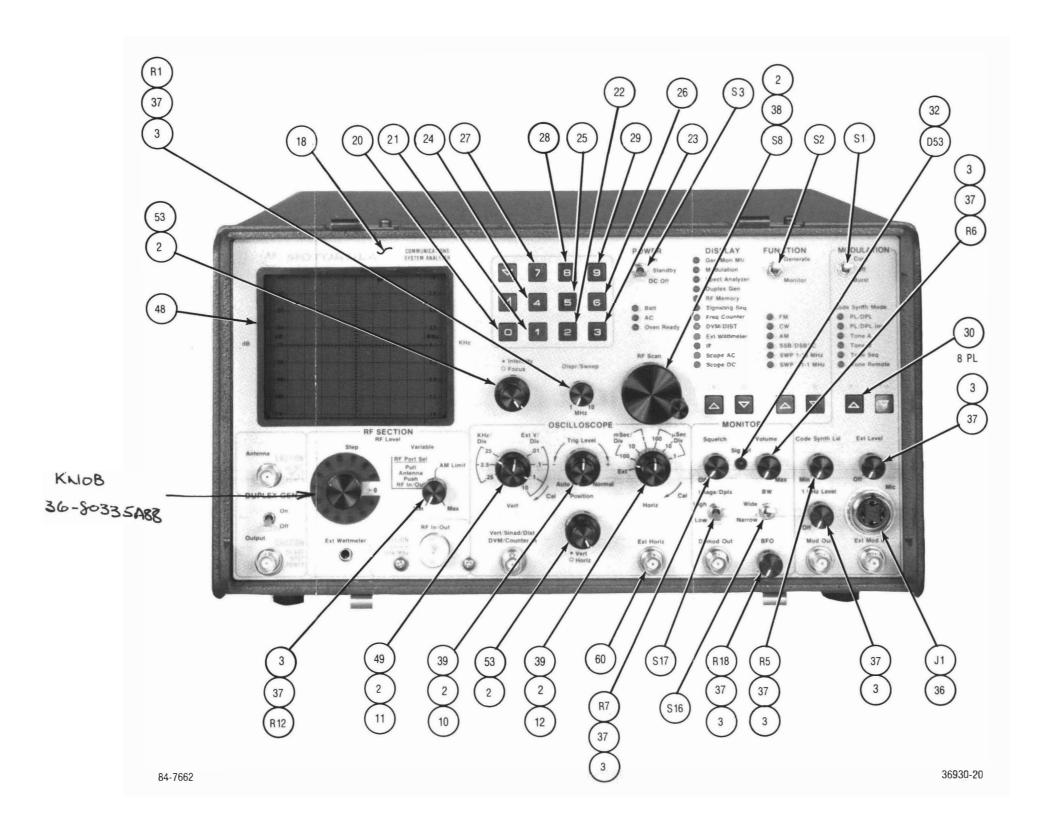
Front Panel Photo (See Sheet 4, p. 18-9, for Parts List)
